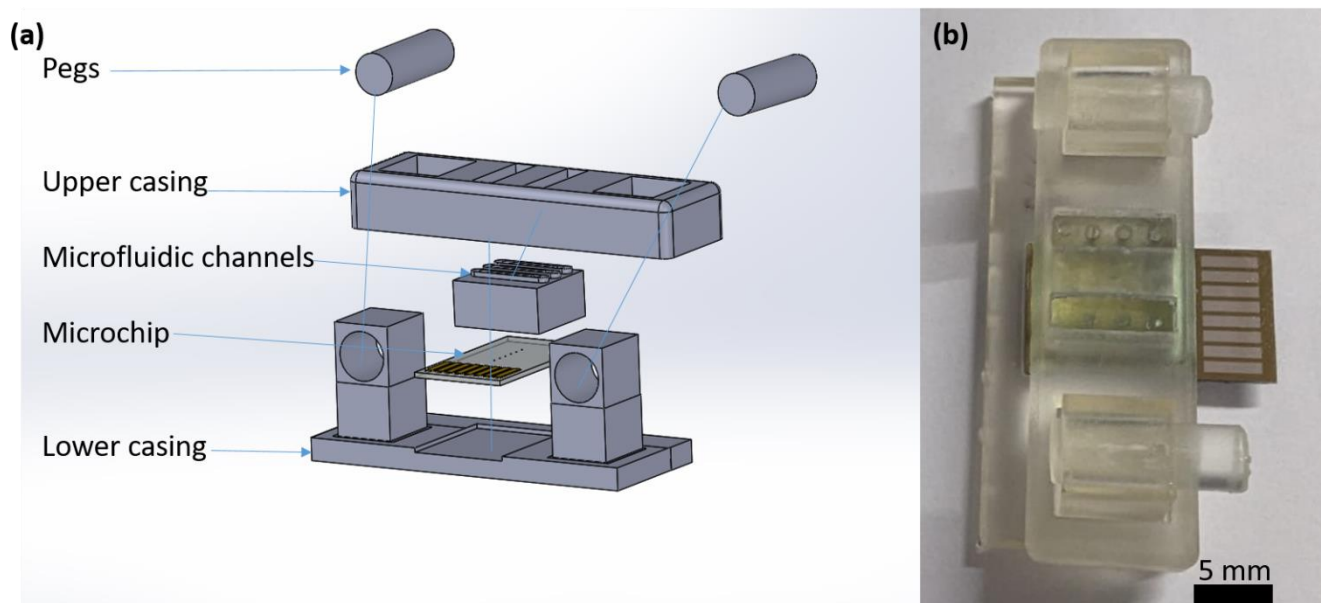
(A) Exploded view of the microfluidic platform and (B) top down view of assembled system with chip
